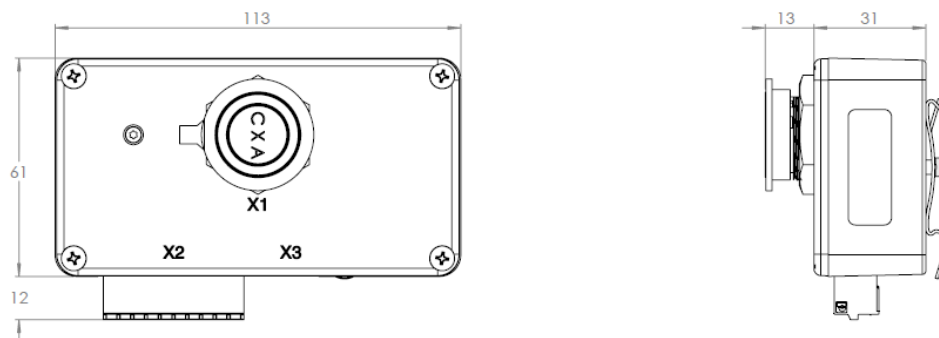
Patch Board Mk2 Enclosure Dimensions (mm)
